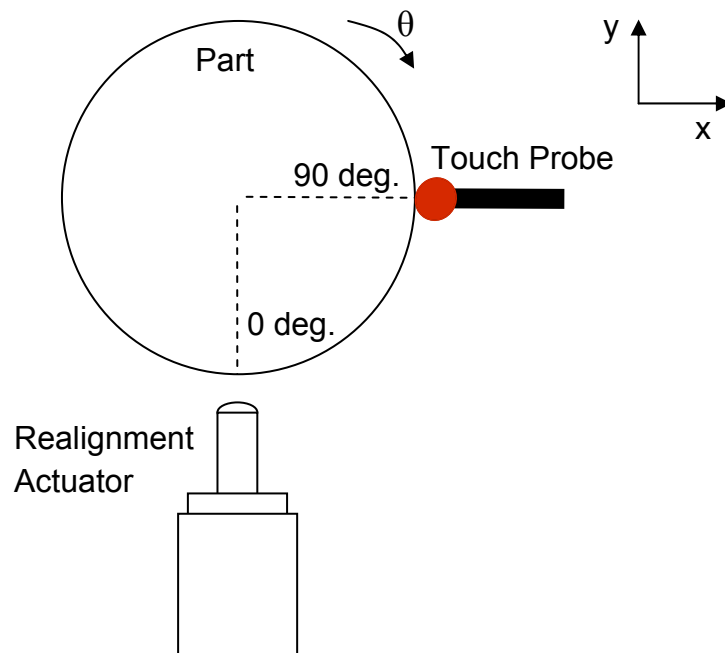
Front View of Part, Actuator, and Touch Probe Setup
